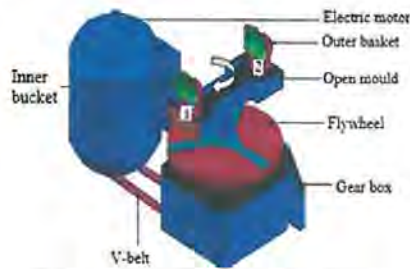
Centrifugal casting machine with an opened mould in which the buckets are facing the same direction
